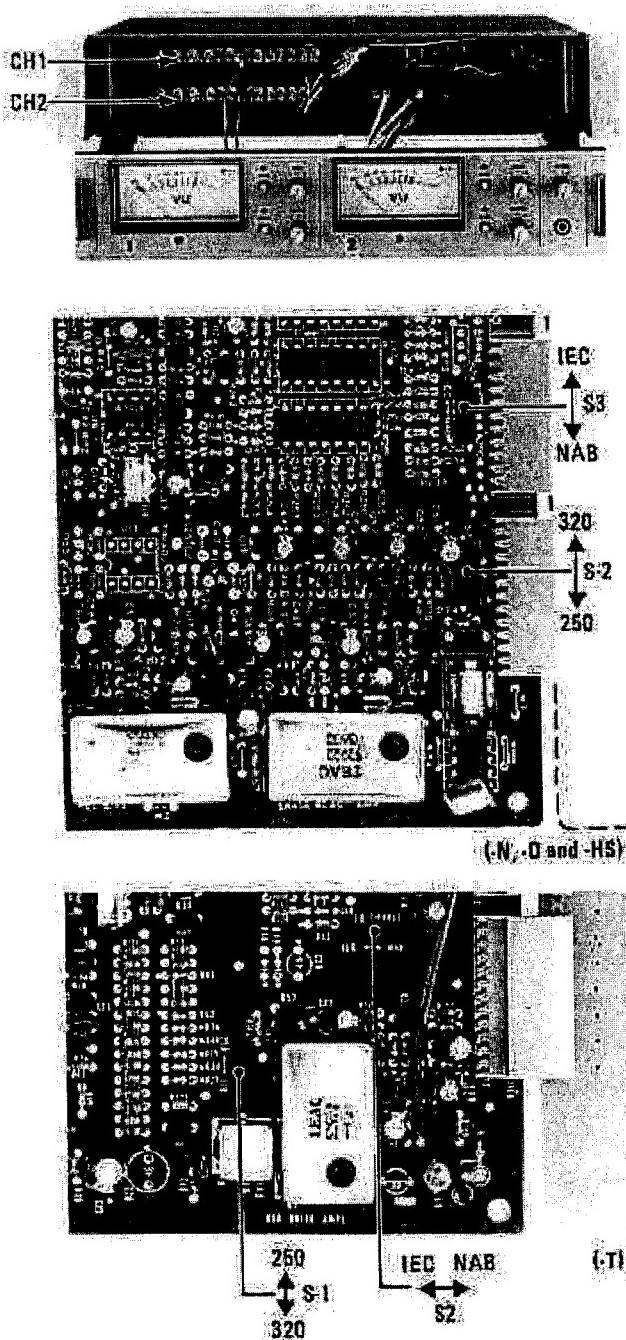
RECORD/REPRODUCE PCB ASSEMBLY.
